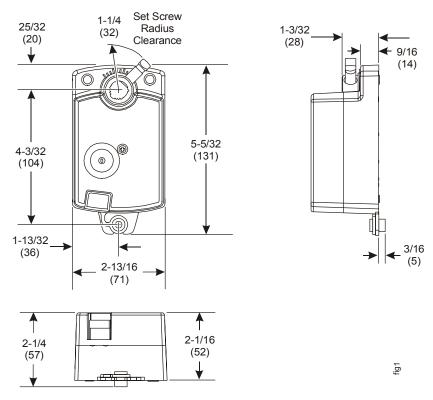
EN35C2-T and EN35C2-P Series Electric Non-Spring Return Actuator Dimensions, in. (mm)
